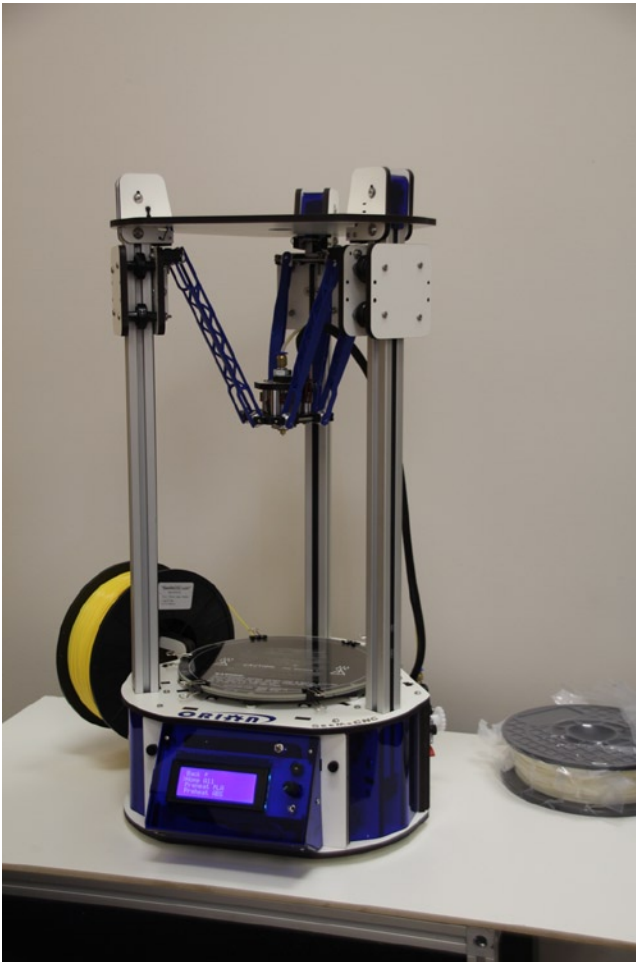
A Deltabot 3D printer (the SeeMeCNC Orion). Photo courtesy of SeeMeCNC
